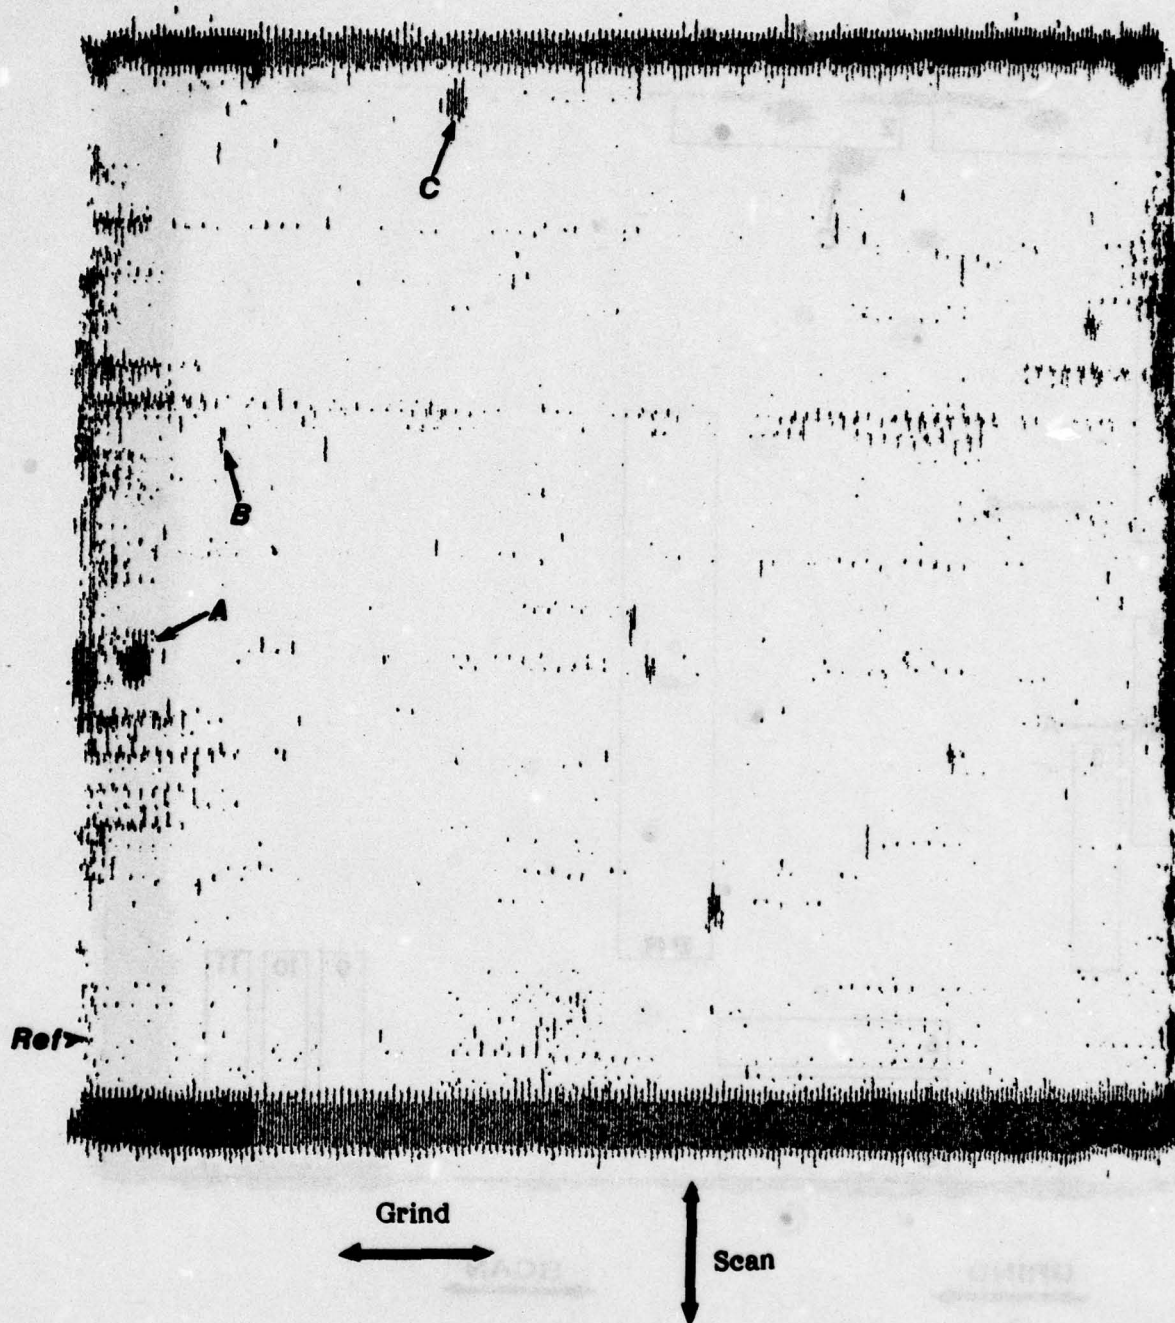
C-scan Recording of 45 MHz, 18° Surface Wave Inspection of Top Surface of Billet of Ceralloy 147A HPSN After Machining (Scan Perpendicular to Grinding Direction).
